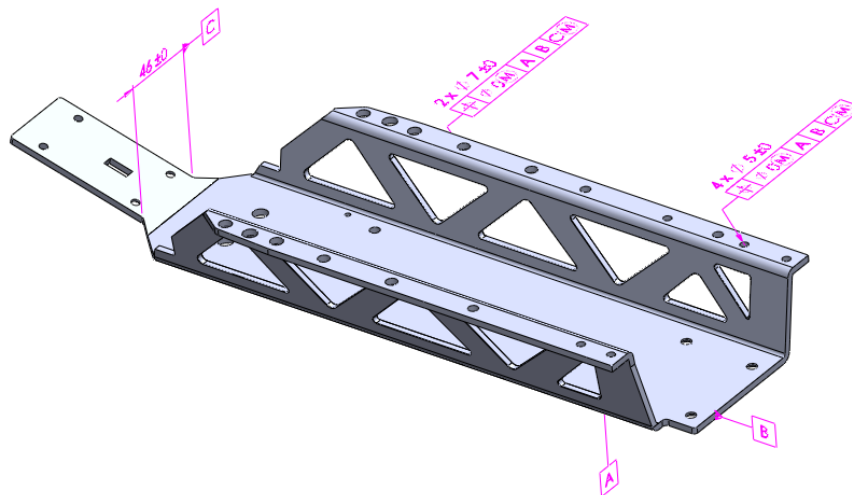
24: Size Tolerance Frames for the Chassis
